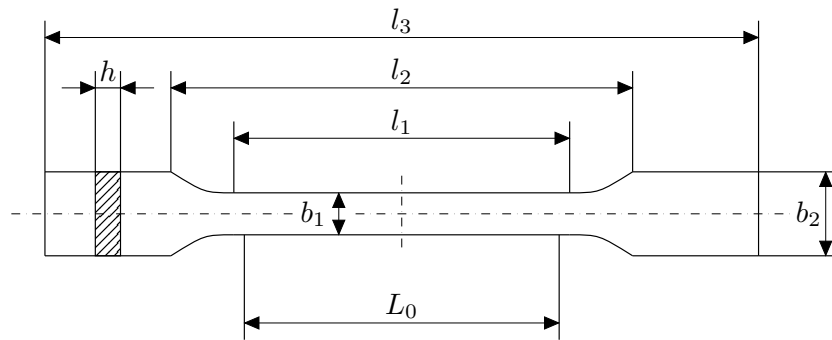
Drawing of tensile specimen (following ISO 527-2).
